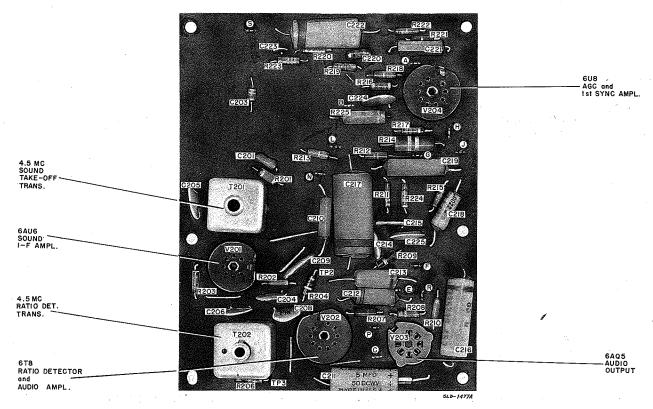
Top View, Printed Circuit Board PW-200, Sound I-F Audio, AGC, 1st Sync-CTC5.
